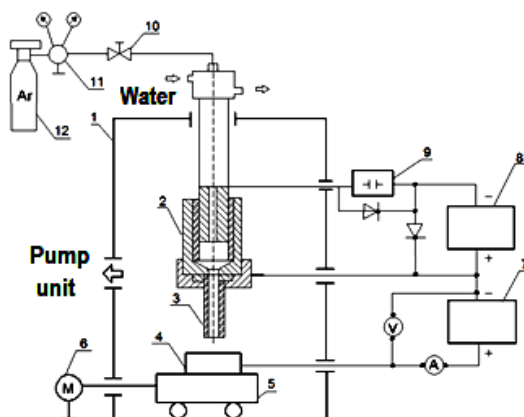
Scheme of the device for vacuum arc treatment: 1 – vacuum chamber; 2 – burner; 3 – hollow cathode; 4 – welded parts; 5 – manipulator; 6 – electric motor; 7 – main power supply; 8 – auxiliary power supply; 9 – capacitor battery; 10 – gas supply; 11 – pressure reducing valve; 12 – container for plasma forming gas.
